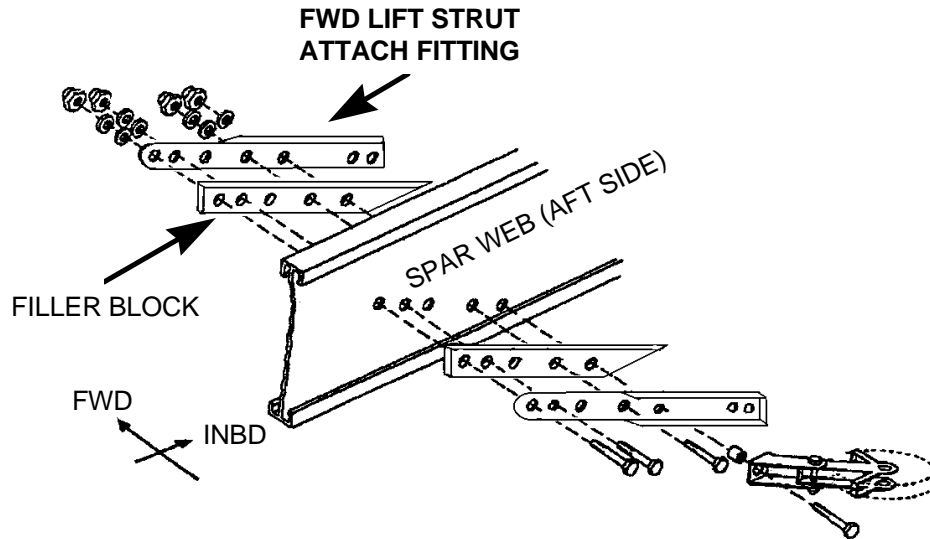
Close-up View of Forward Lift Strut Attach Fitting Assembly
